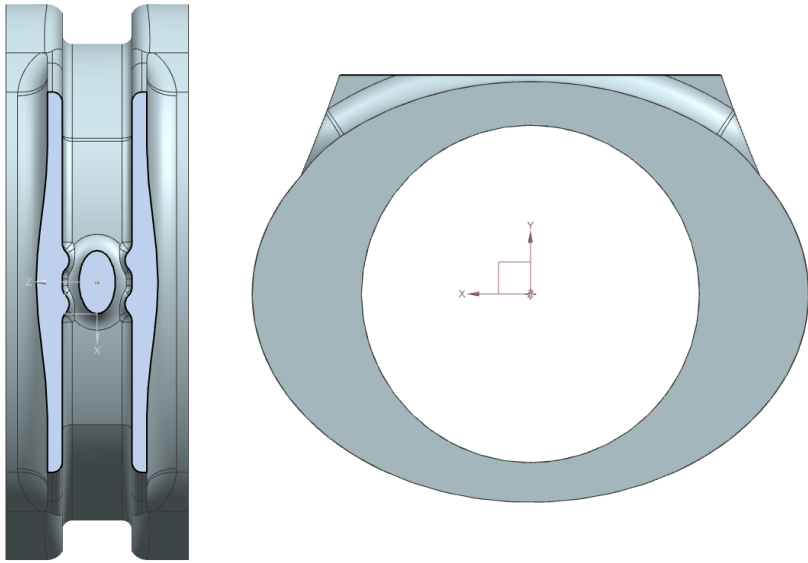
Cross-section of 2.1 beam; bottom beam section.
